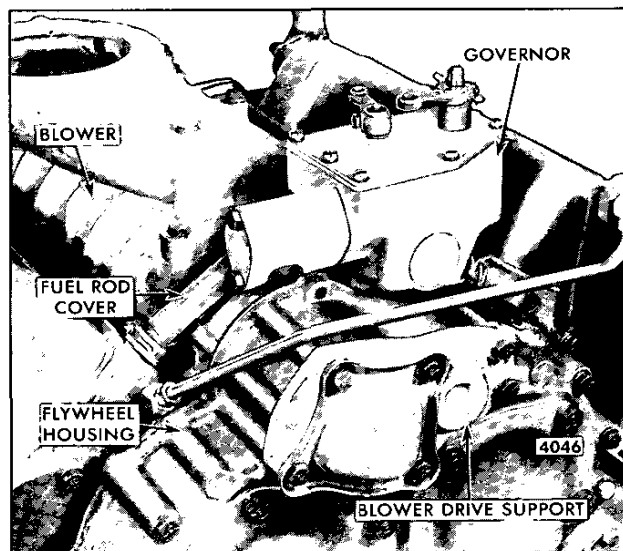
Blower Drive Support Mounting on 6V-53 Engine
